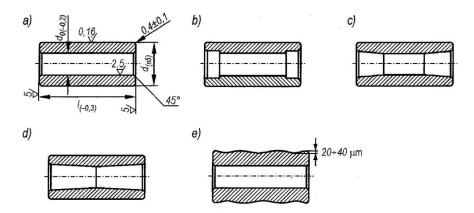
Piston pin construction examples: a) b) cylindrical pins with openings, c) d) pins with cylindrical holes, e) pin with a profiled shape of the exterior surface.
